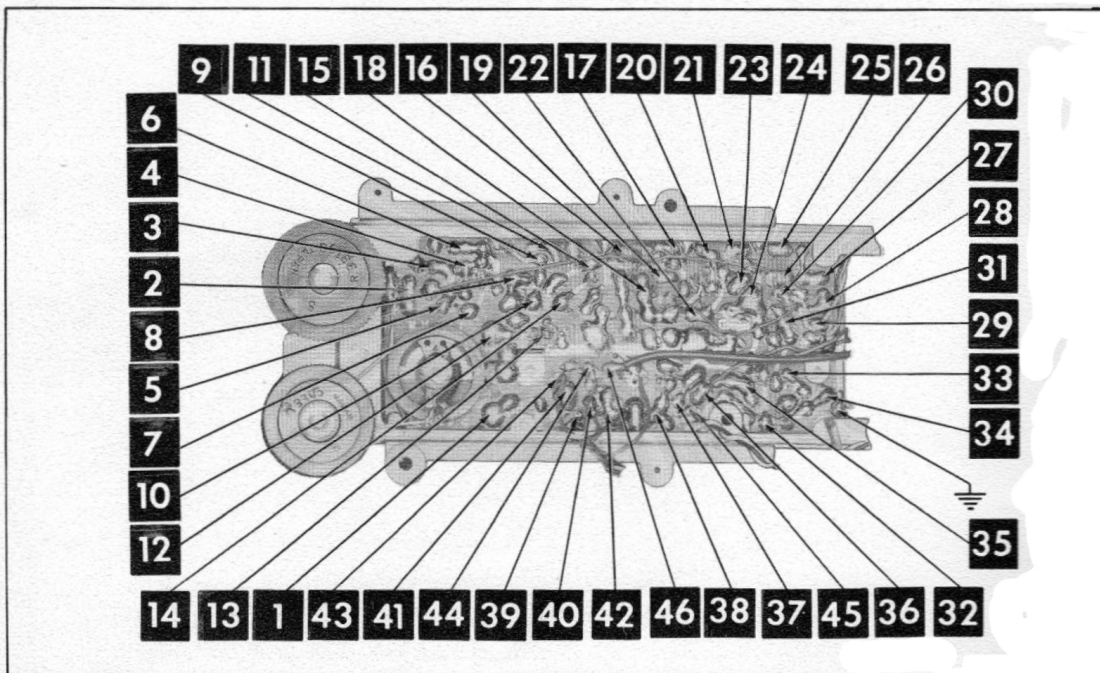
Bottom View of Chassis--Location of Printed Circuit Points
